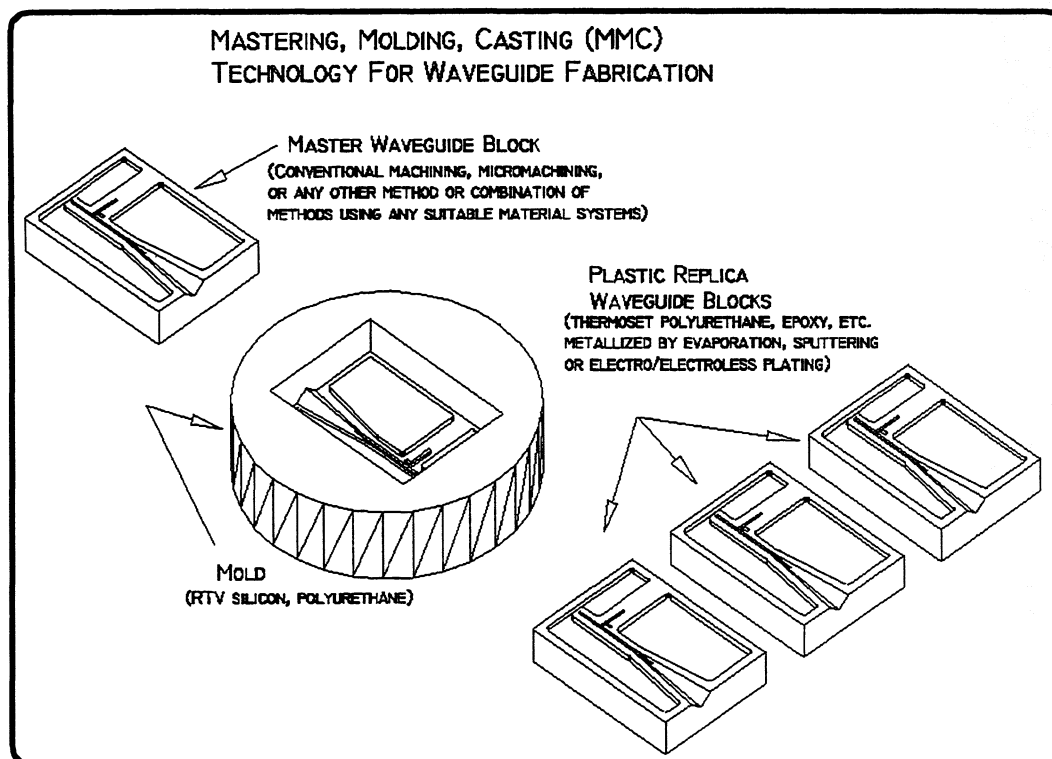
The basic principle of fabricating split-block components by the method of Mastering, Molding and Casting (MMC).
